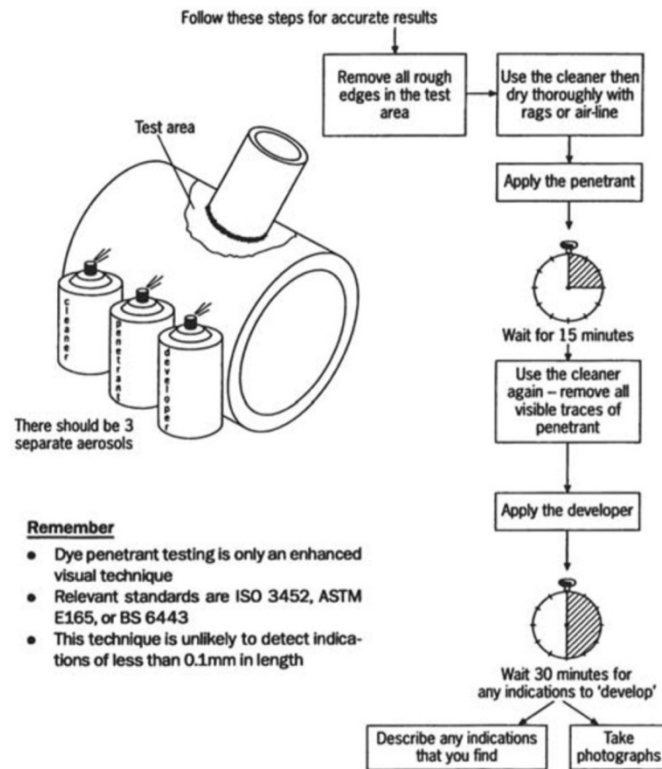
Illustration for Liquid Penetrant Inspection [31].
